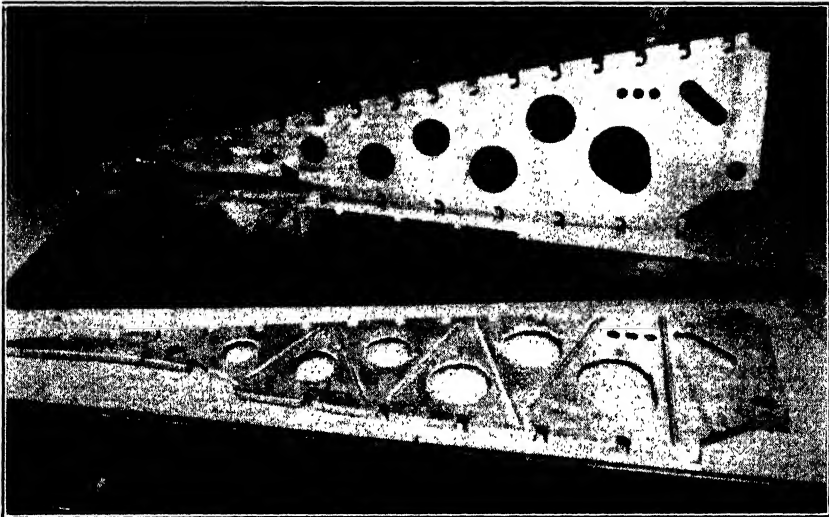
An alloy-aluminum wing rib and blank with Masonite punch for use in rubber die forming. (Courtesy Douglas Aircraft Co.)
